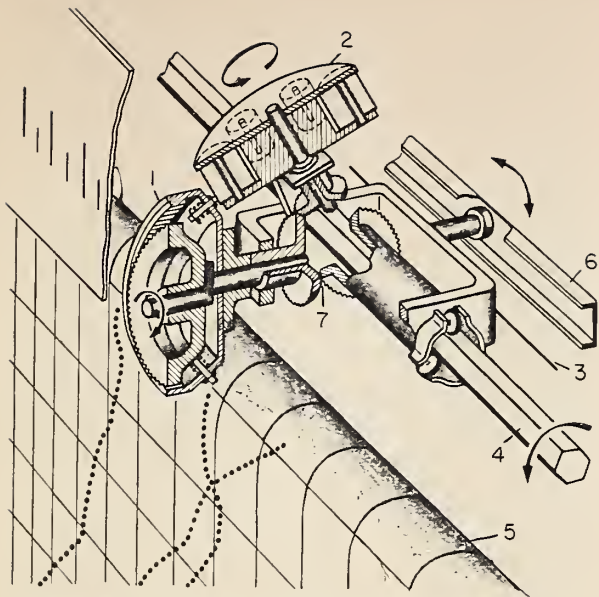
Print wheel with synchronized inking pads (Siemens & Halske).
